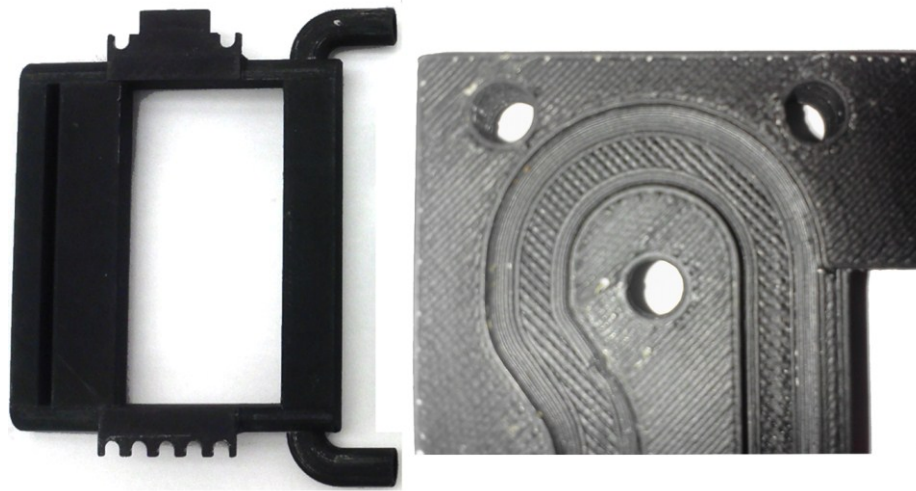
3-D printed part and close-up to show surface texture.
